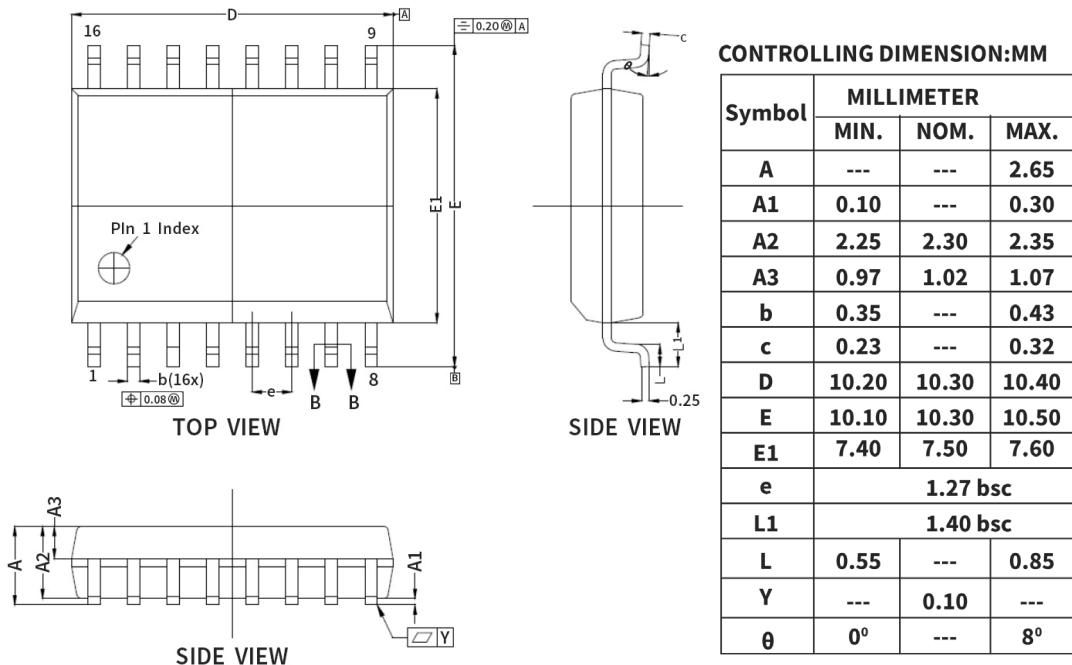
SOW16 Package Shape and Dimension in millimeters
